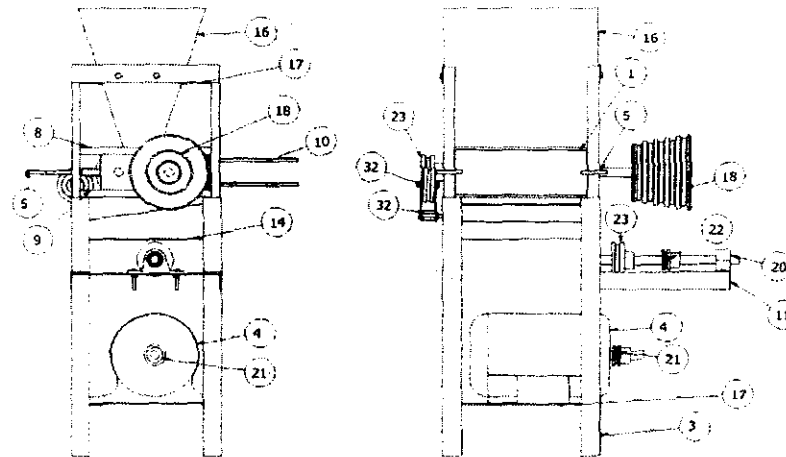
Elevation and side view detail of the apricot stone cracking machine
